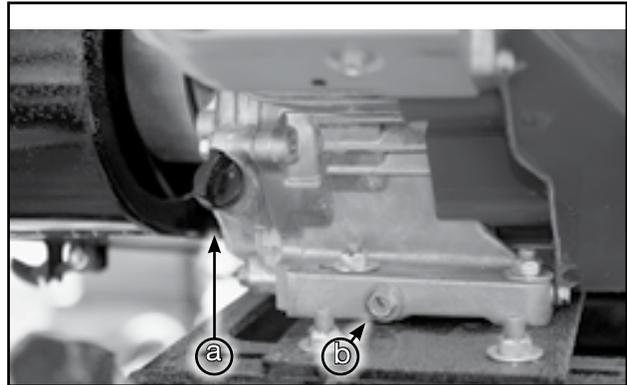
Engine Oil - Fill Plug (a) and Drain Plug (b)
